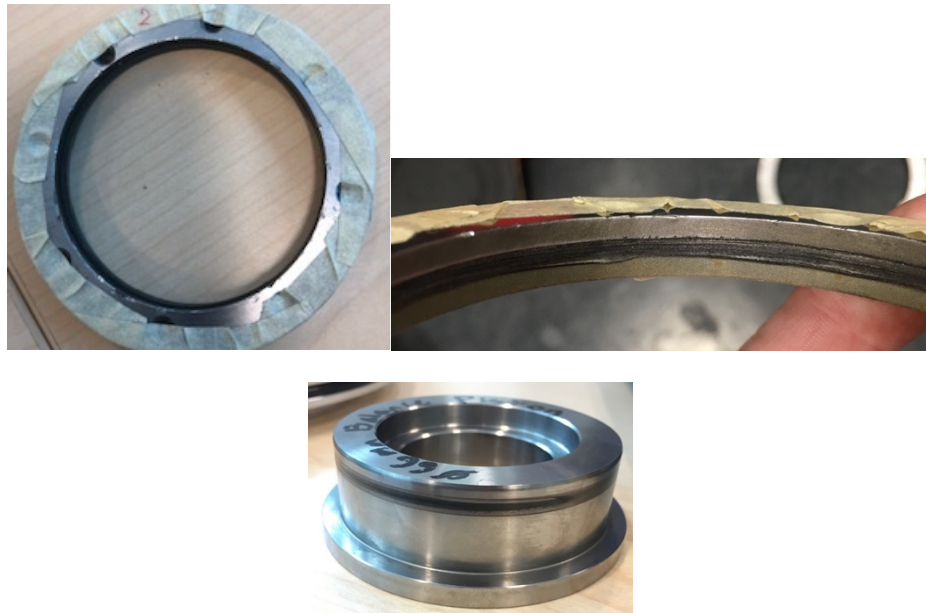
The CNT-coated metal mesh seal (top, ID: 66 mm) and the mating shaft (bottom) after a 43.5-hr compressor durability test using fixed seal mounting. Plastic deformation and wear observed on the seal ID. A layer of carbon transfer film seen on the shaft (no surface damage).
